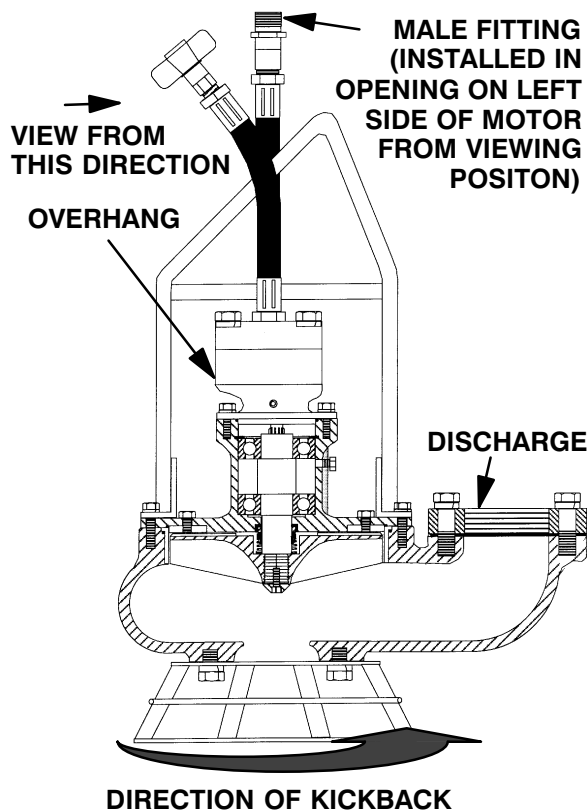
Hydraulic Motor And Hose Positioning/Kickback Direction
